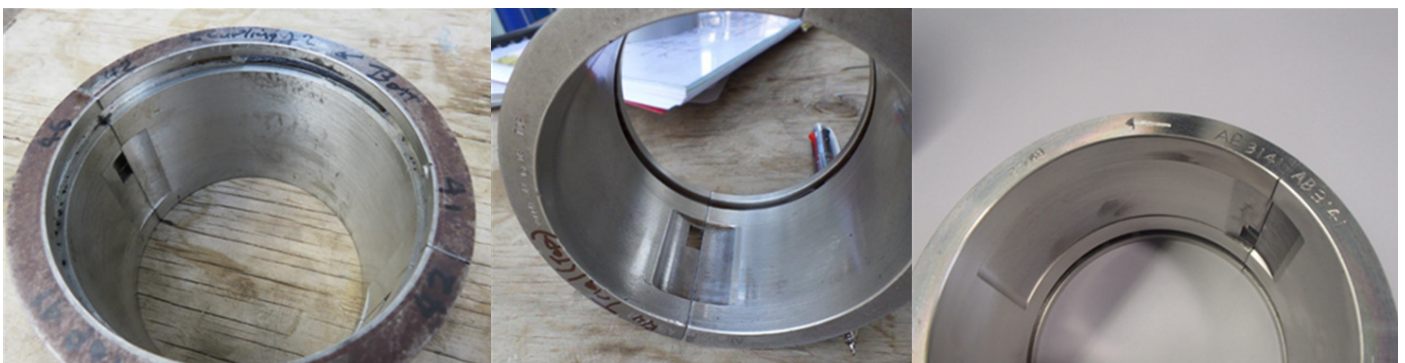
Control Bearing (Left), Known Unstable Bearing (Middle), New Profile Bearing (Right).
